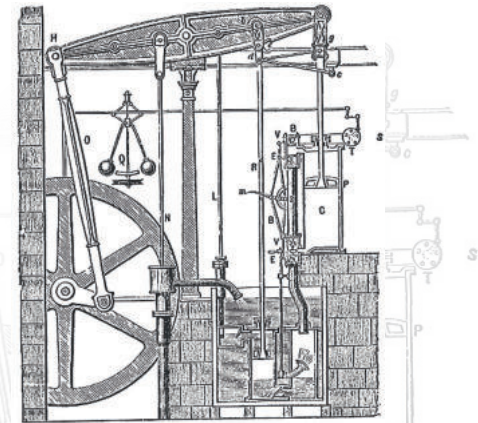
A drawing of the steam engine by Boulton & Watt
